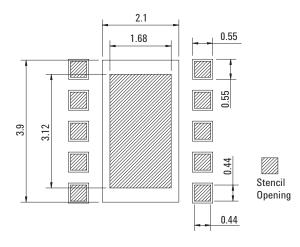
Combined PCB and stencil layouts (dimensions in mm)
